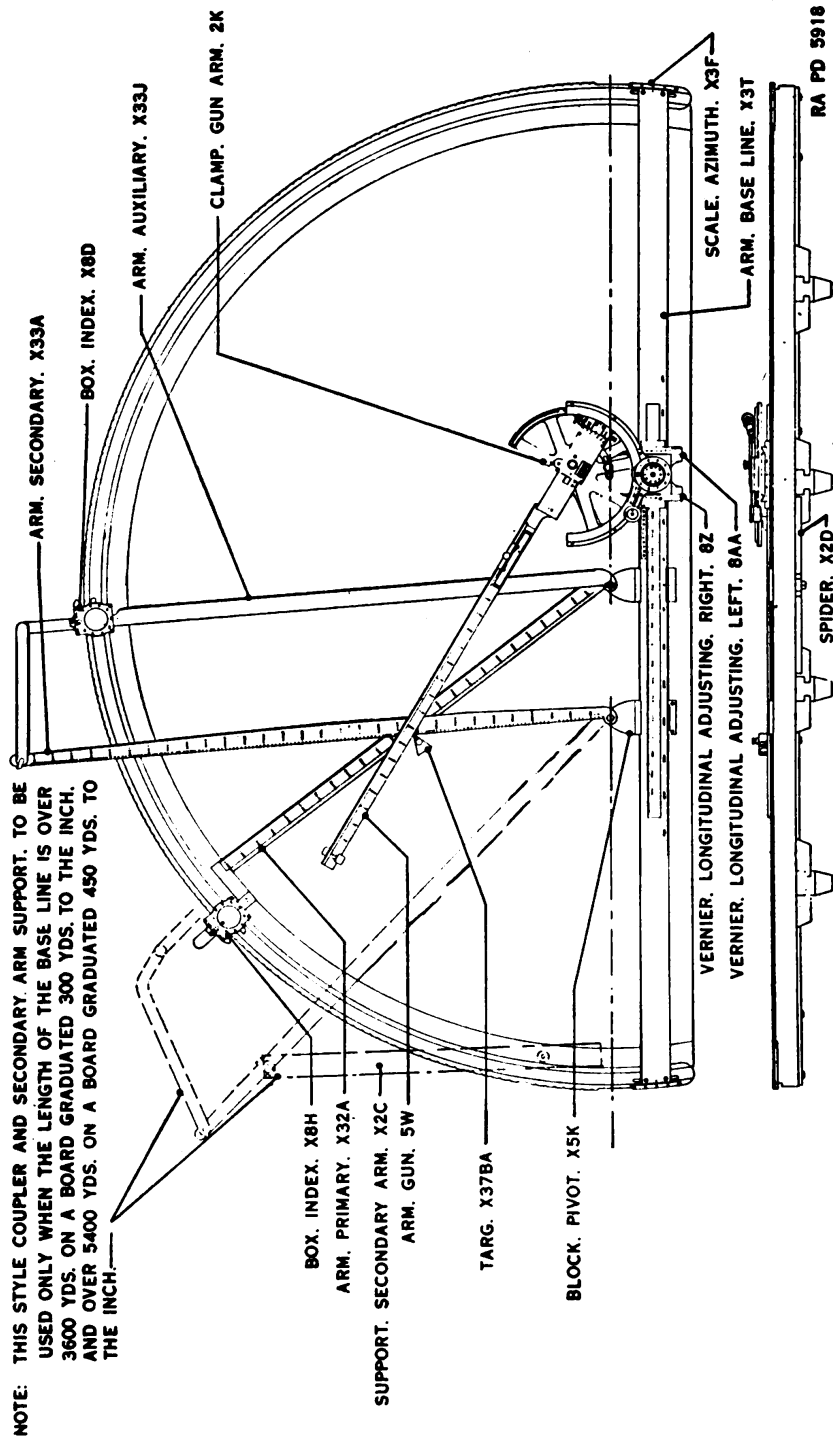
Plotting board M1904 (Whistler-Hearn)—assembled views.
